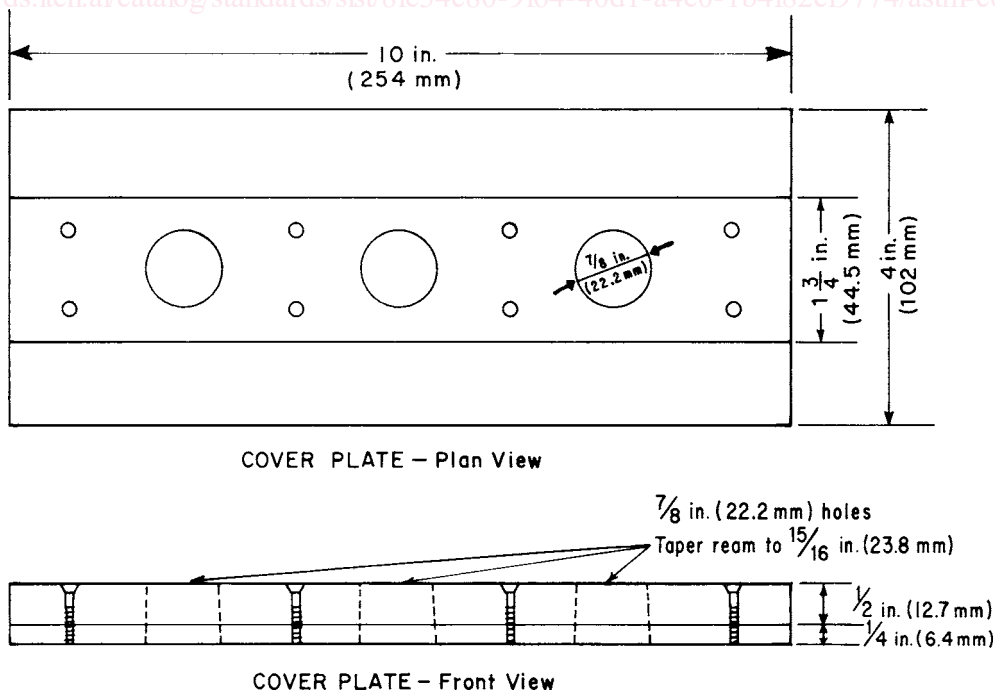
Sketch of Cover Plate for 2-in. (50-mm) Cube Mold
